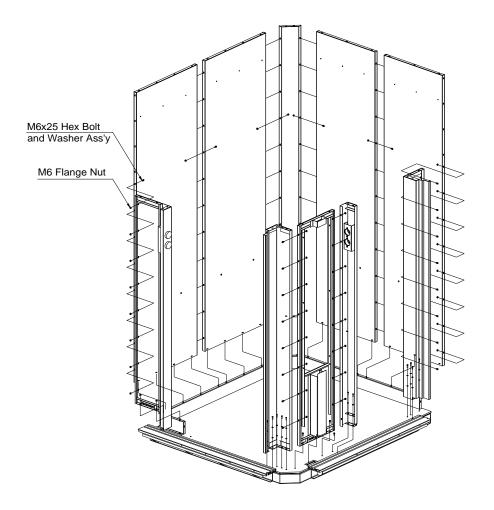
D. CAR PANEL ASSEMBLY (CORNER POST)
